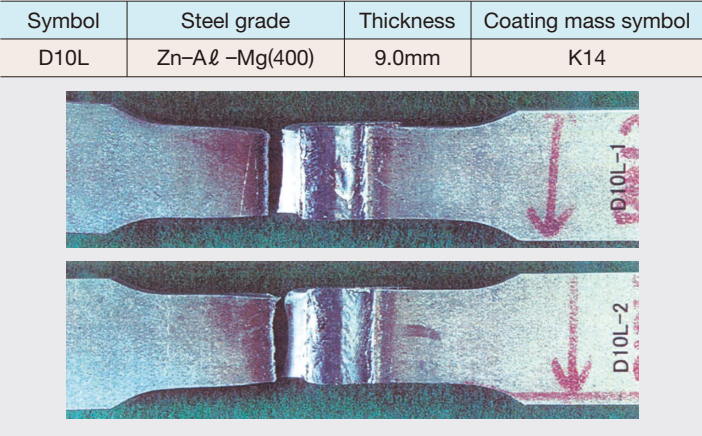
Fracture Conditions in Tension Tests for Lap Fillet Weld Joints (thickness: 9.0 mm)
